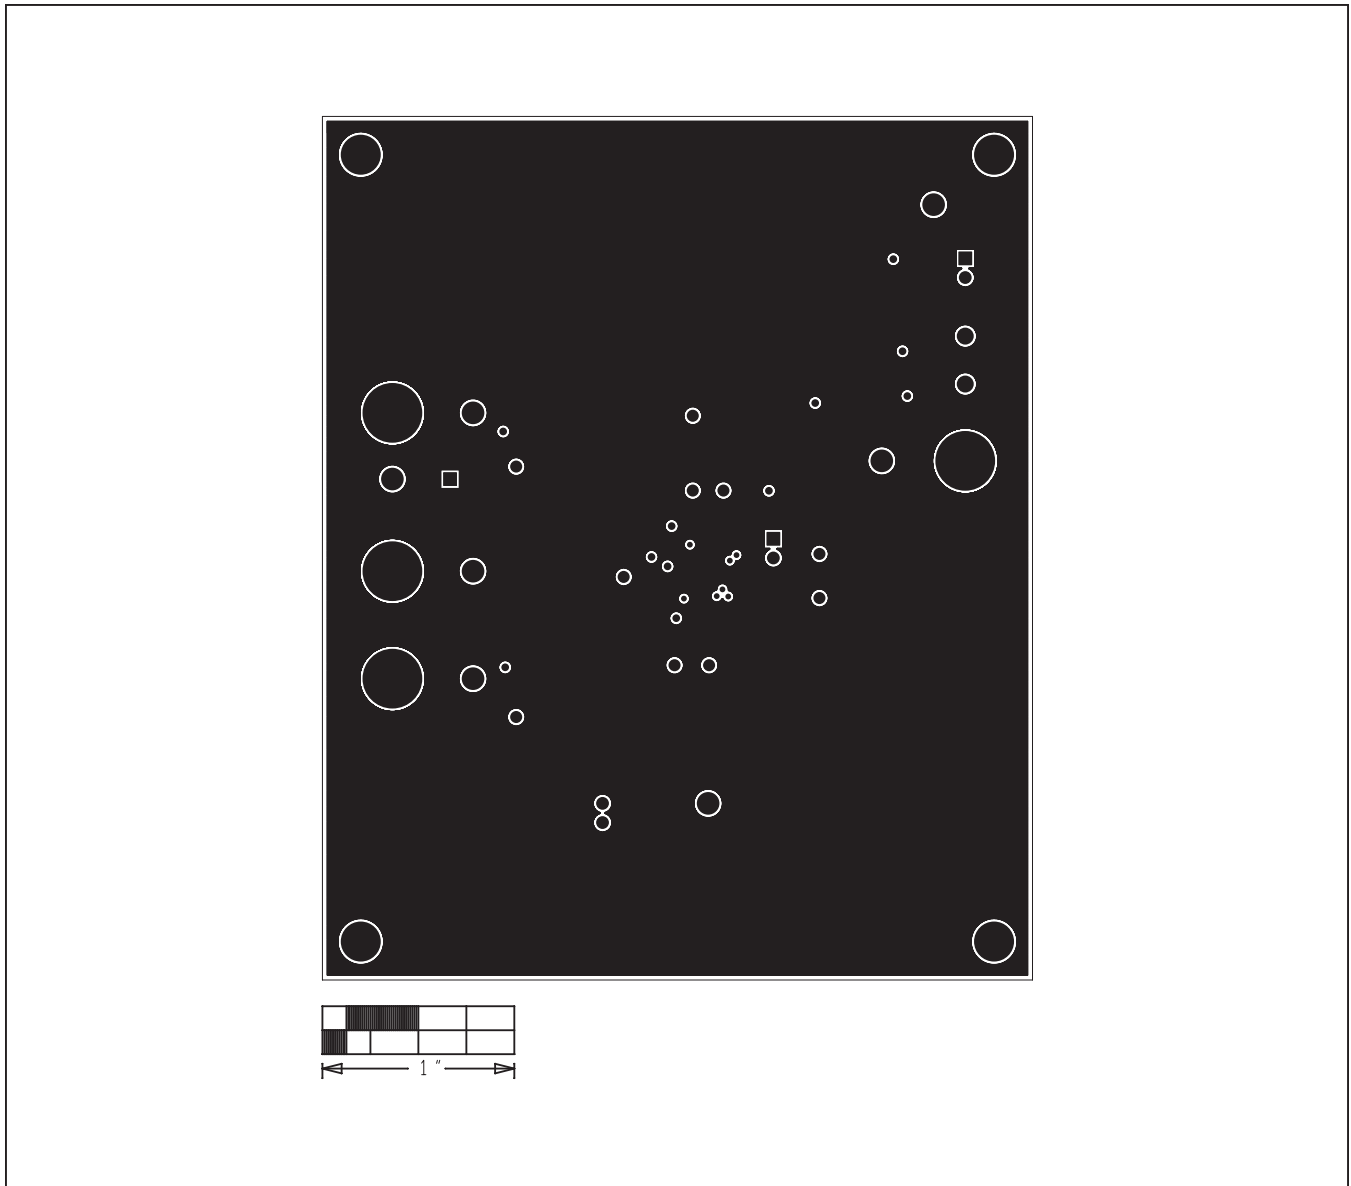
MAX15068 EV Kit PCB Layout—Solder Side
